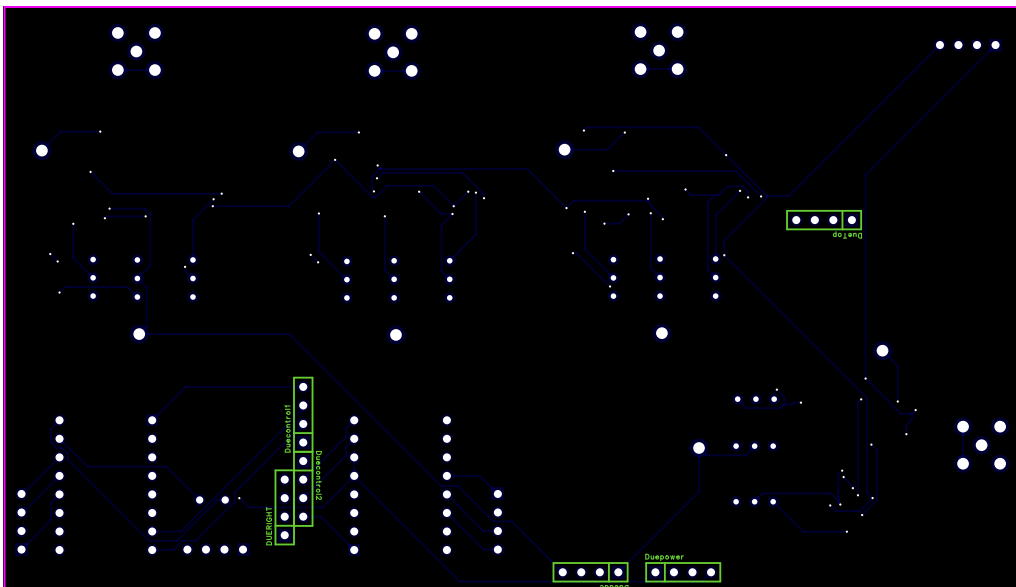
Bottom view of the PCB design for the Arduino shield.
